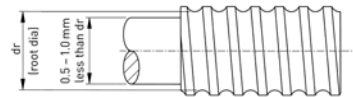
Area of surface hardening on a ballscrew shaft
